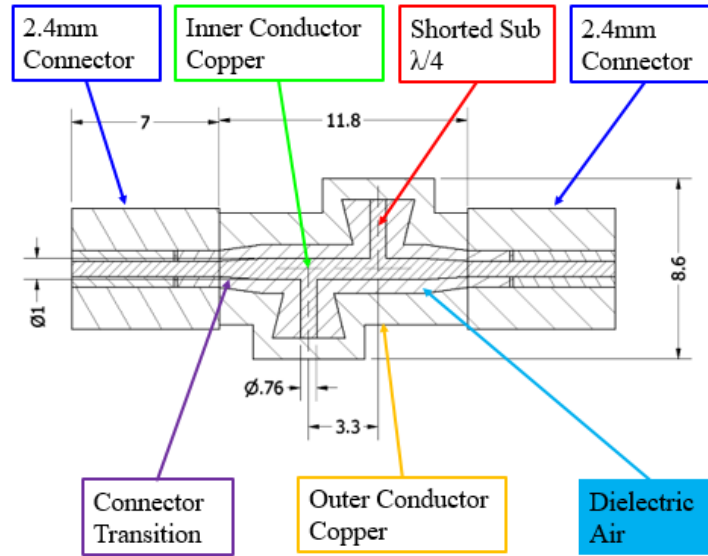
Simplified mechanical drawing of the shorted stub coaxial approach as an anchoring block, all dimensions are in mm.
